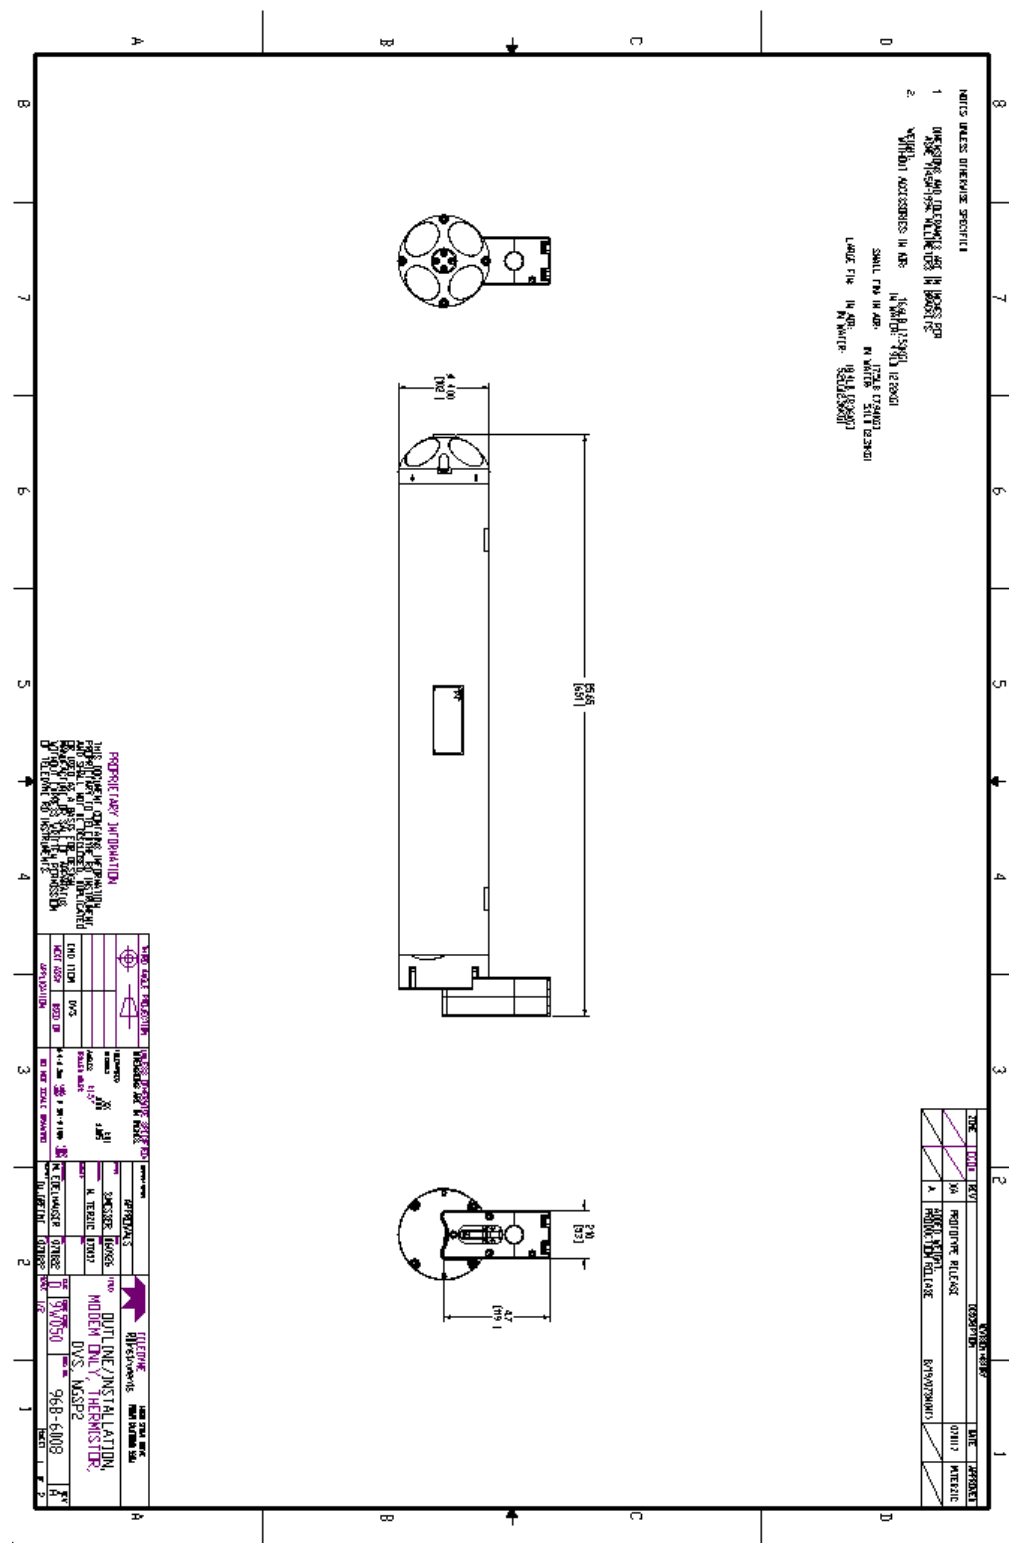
Outline Installation Drawing 96B-6018 Sheet 2
